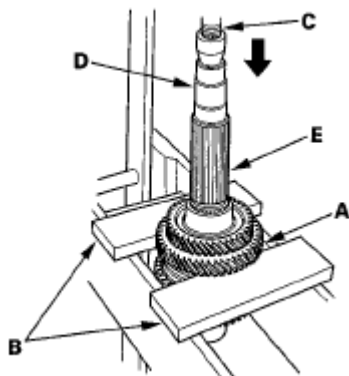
Identifying 2nd Gear, Steel Blocks, Press And Attachment
